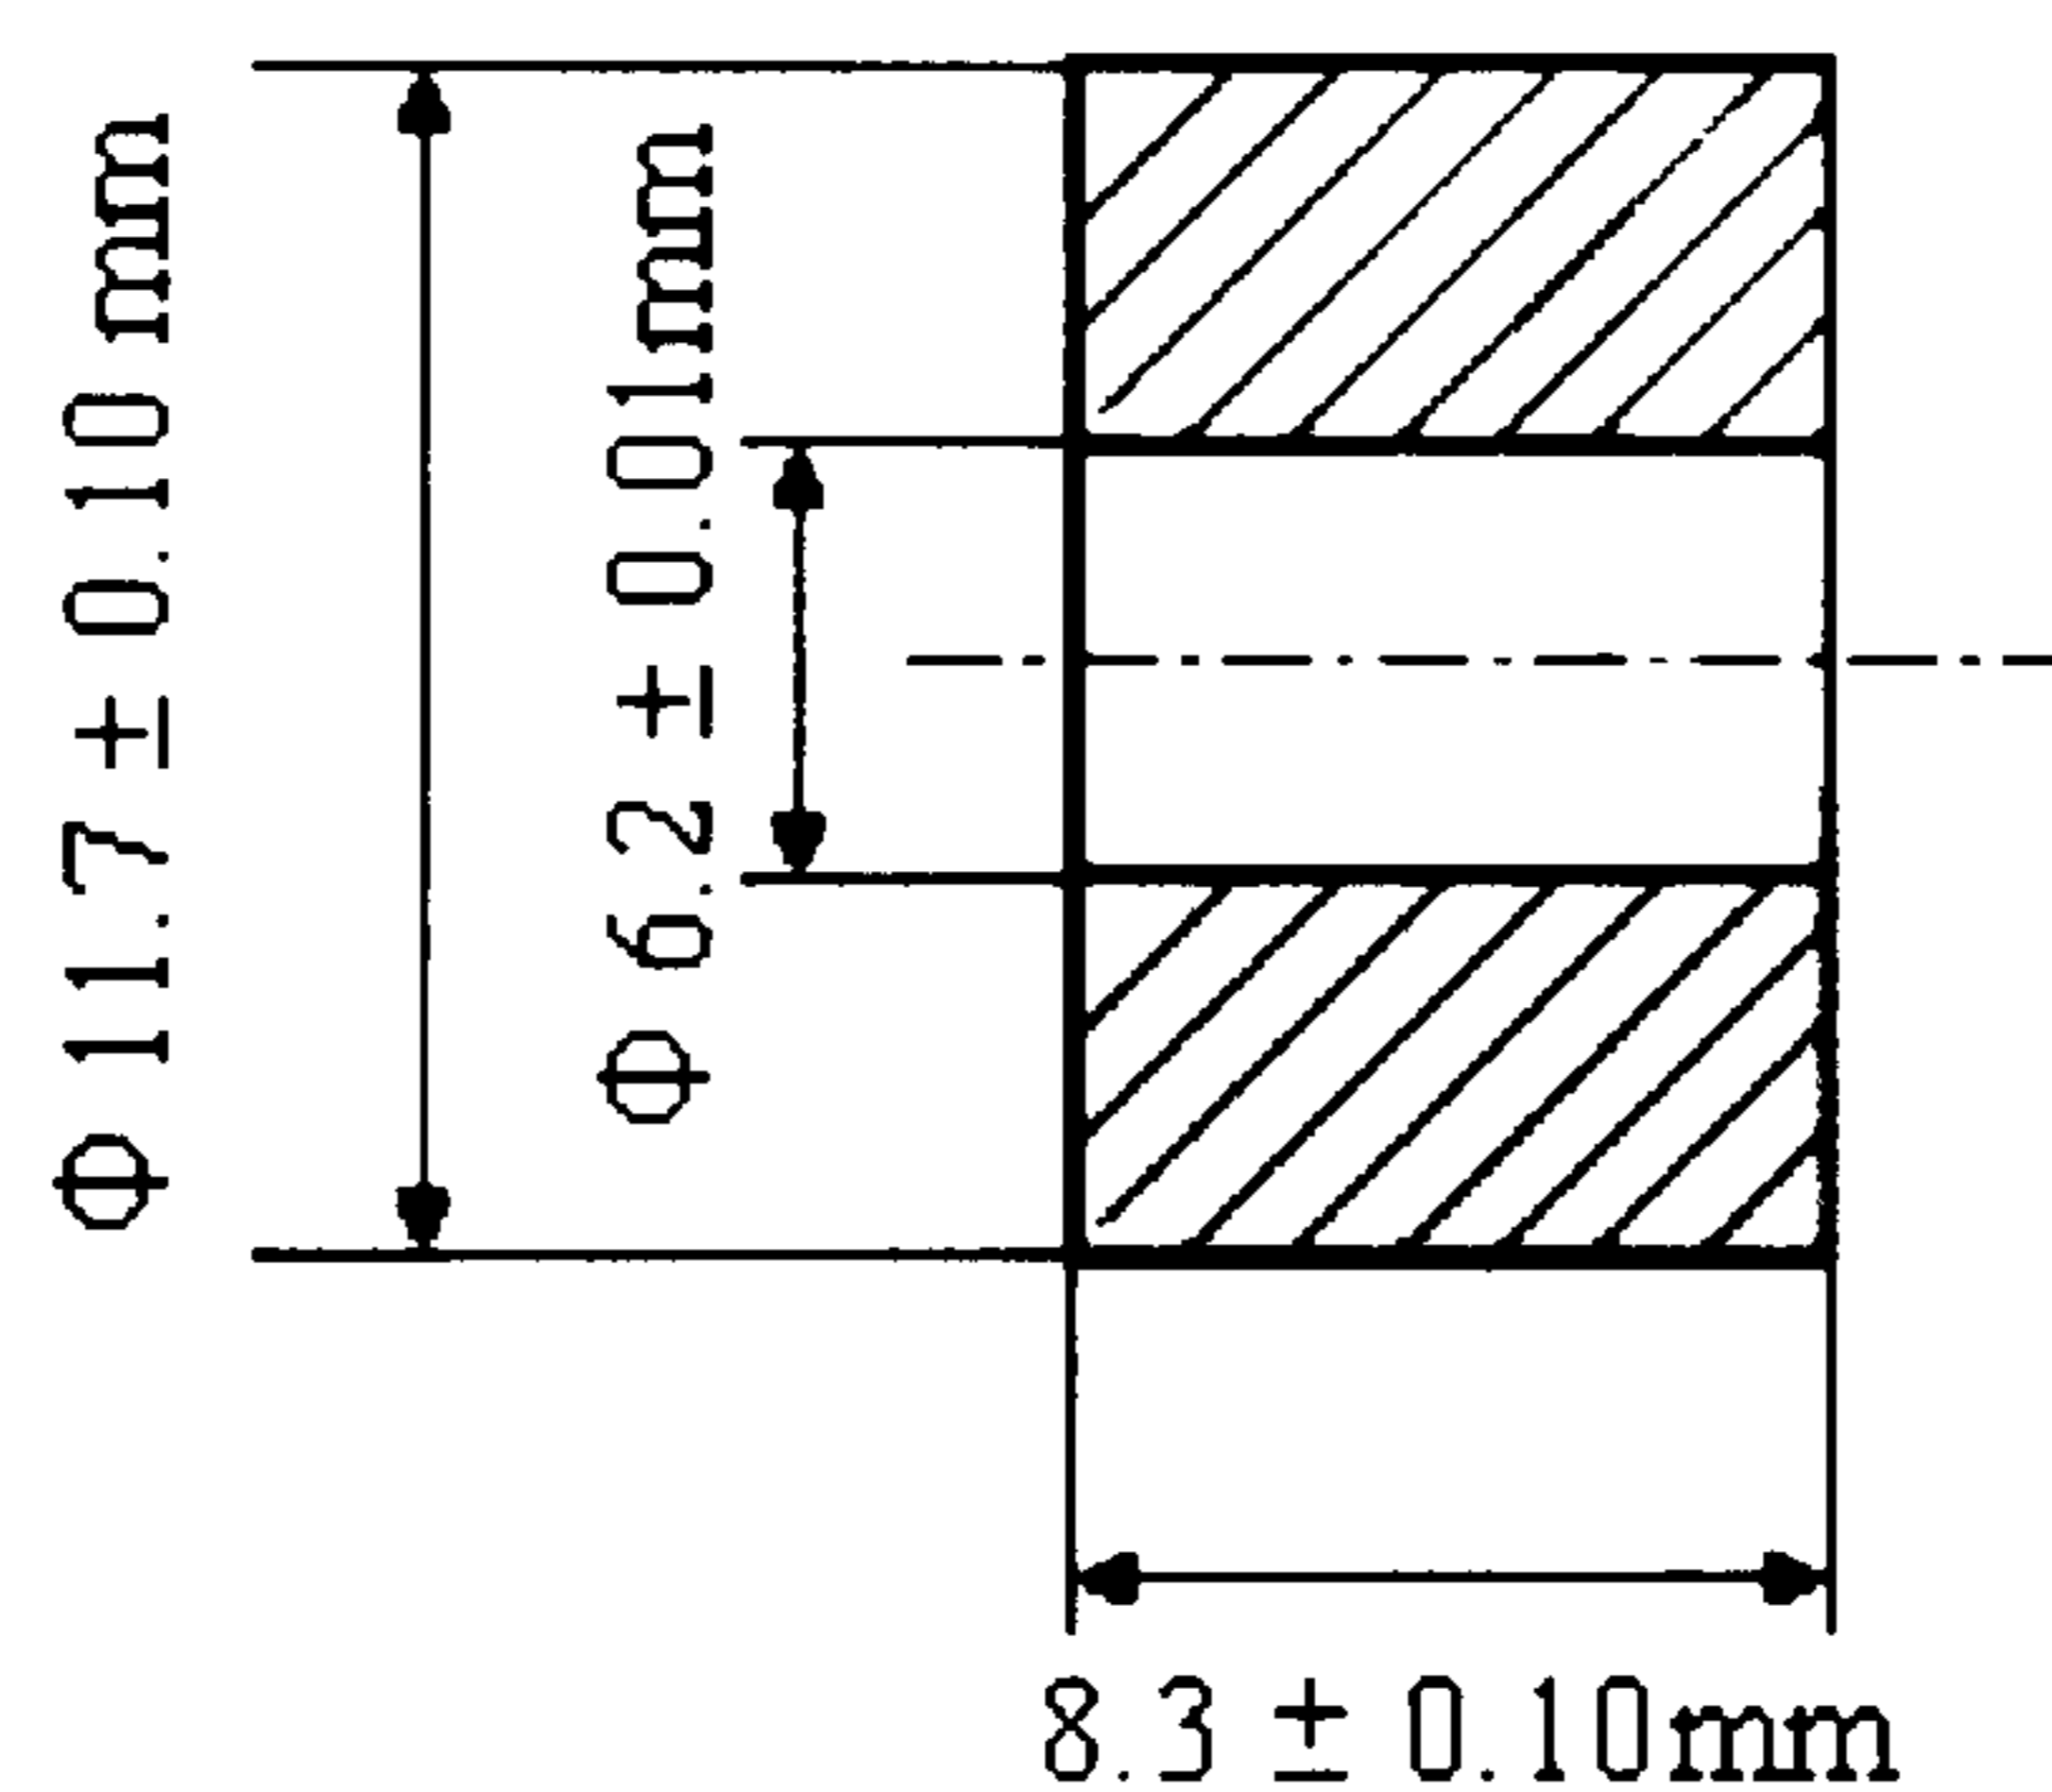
Dimensions of a test specimen of rotating cylinder electrode (RCE)
